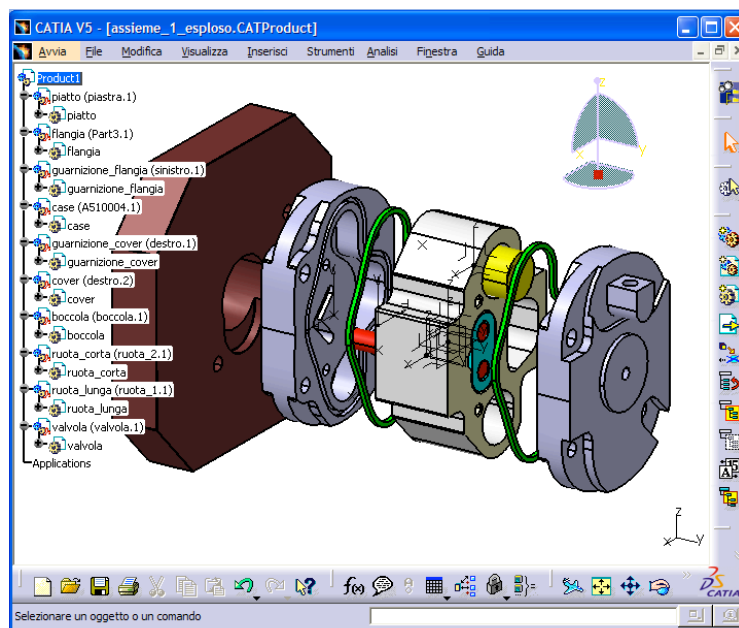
Exploded view of the whole mechanical system including internal components.
